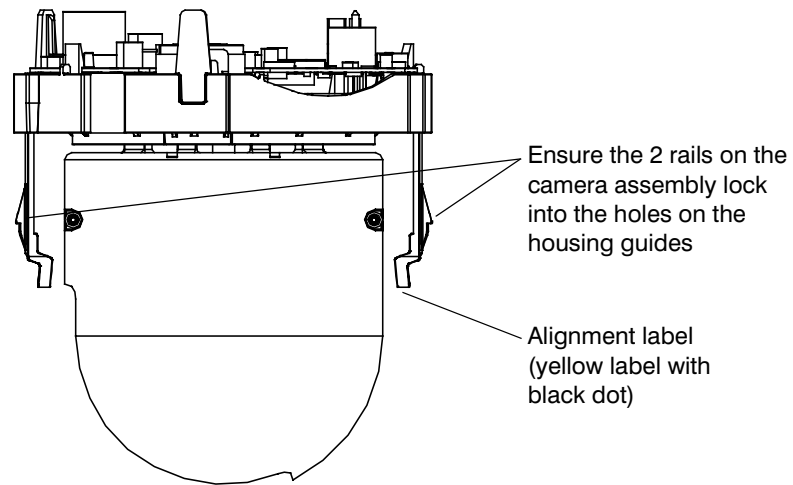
ACUIX Pan and Tilt Camera Assembly Locking Rails
